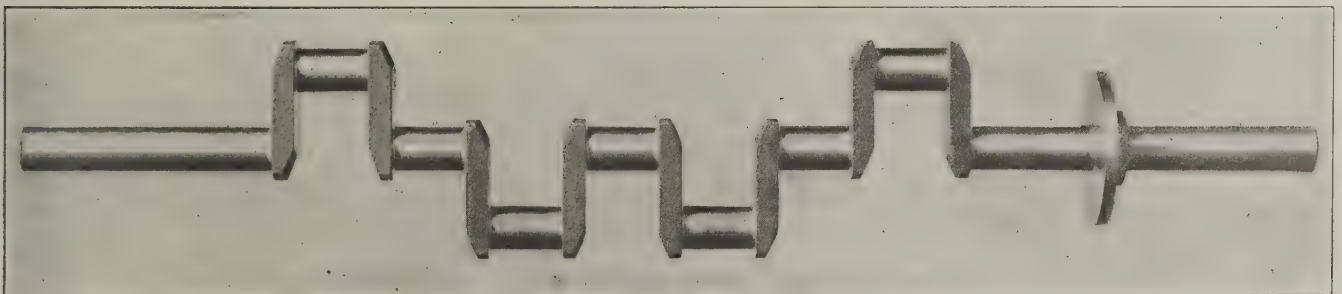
A Crankshaft that is almost entirely finished in the Lathe
